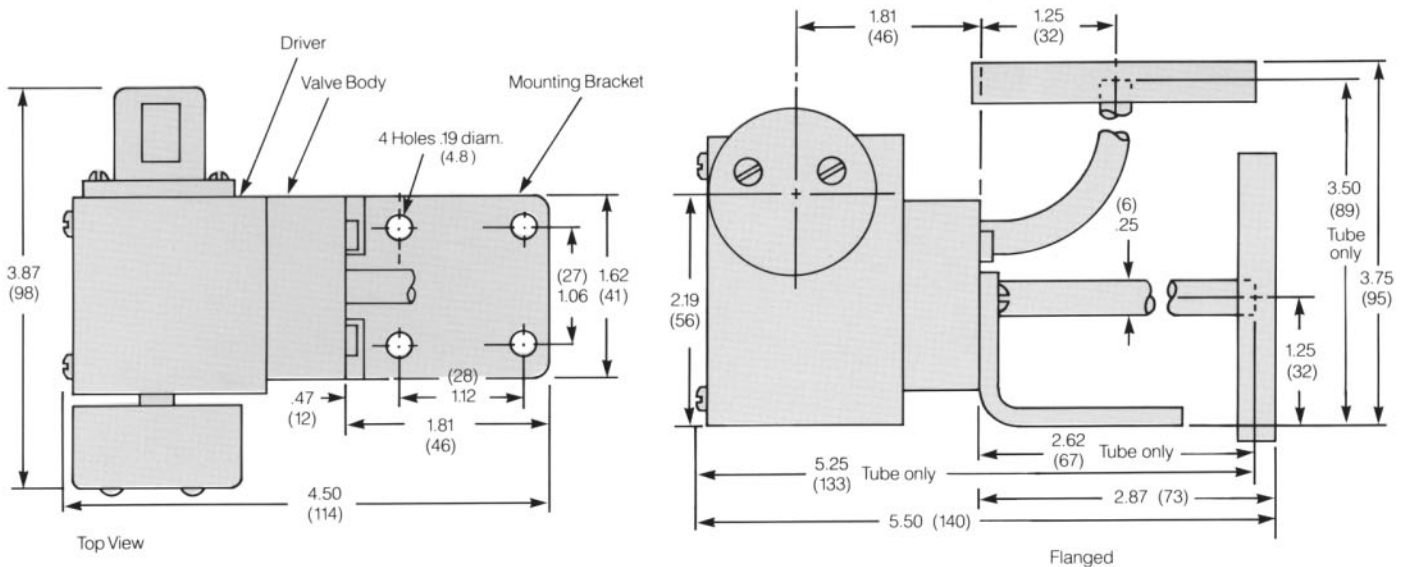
Mounting dimensions for Series 203 Variable Leak. All dimensions shown in inches (millimeters)
